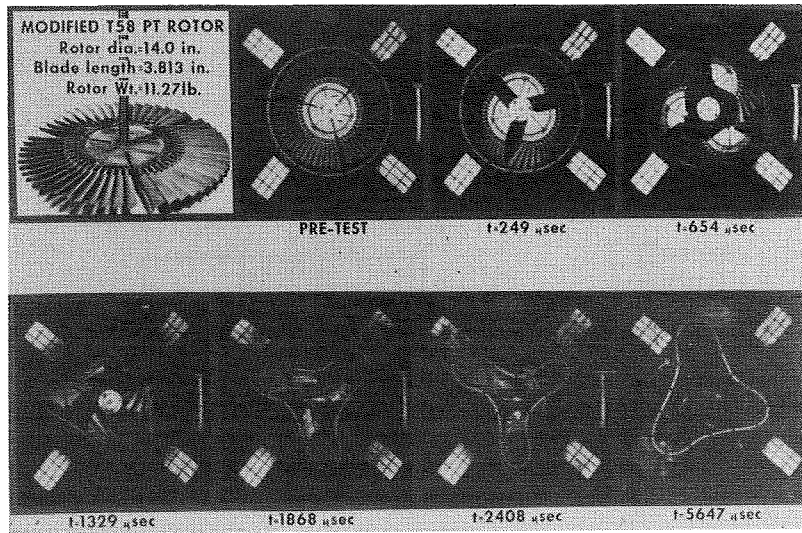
Bladed rotor fragment generator and bladed rotor burst test results (1 in. = 2.54 cm; 1 lb = 4.448 N).
